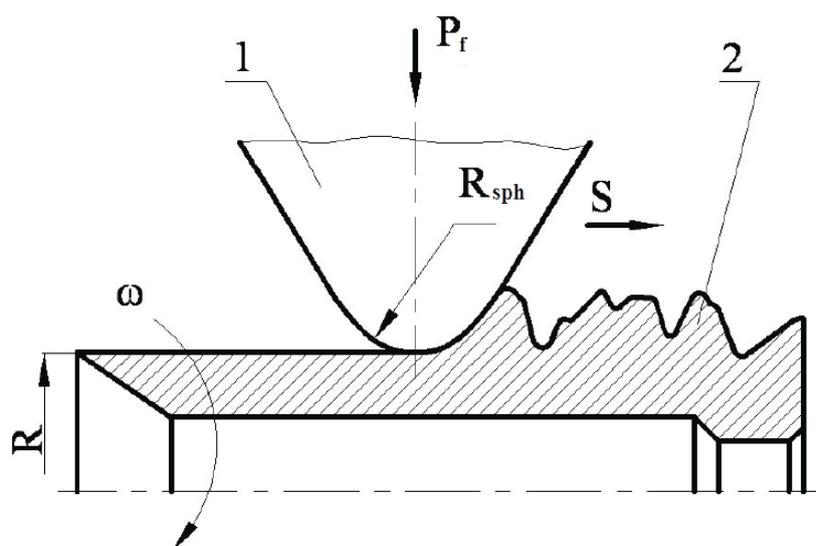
The scheme of diamond burnishing 1 - diamond point; 2 - a shaft ω – part rotation frequency; S – longitudinal feed; P_f – hold down pressure; R_{sph} – radius of diamond point sphere; R – radius of processed part surface .
